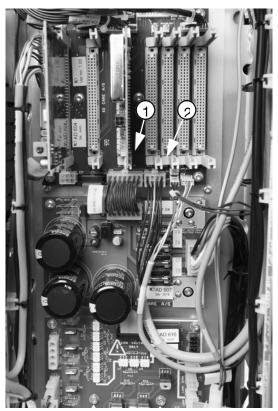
Connecting cables from the instrument bridge: (1) connection of "Bridge Pwr" to J31 and (2) connection of "Bridge Com" to J32
